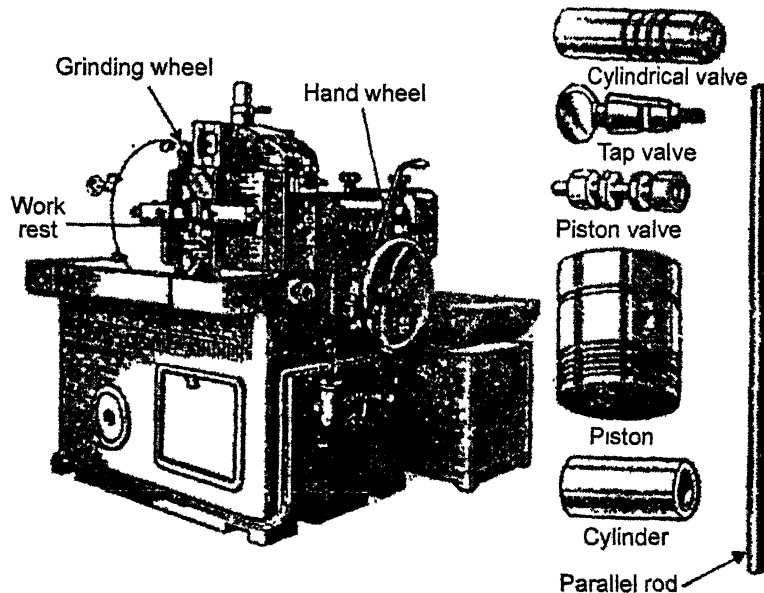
Centreless grinding machine and example of components that can be ground on this type of machine.
